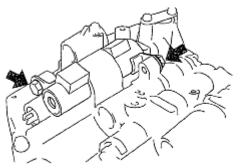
Removing E-Ring Courtesy of MAZDA MOTORS CORP.
